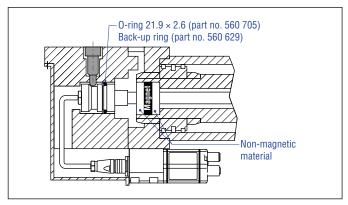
Mounting example of pressure fit flange »S« and sensor electronics with side cable entry
